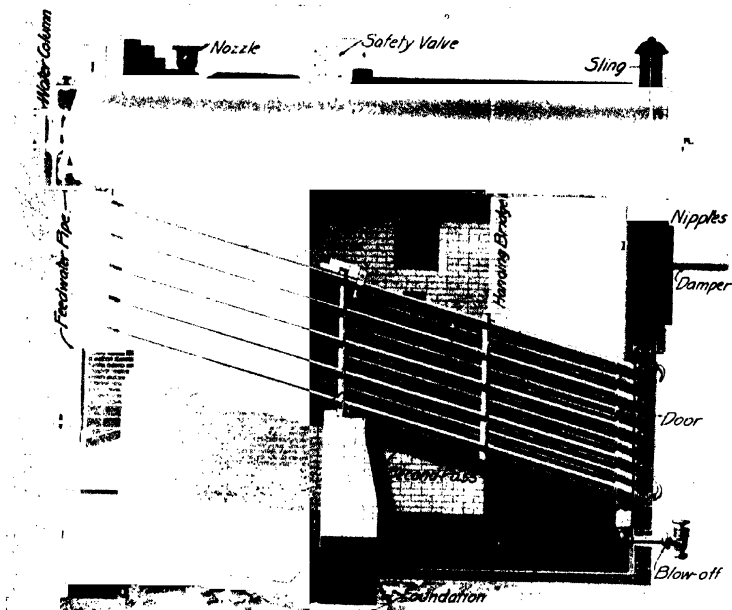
Babcock and Wilcox Longitudinal-drum Water-tube Boiler.
